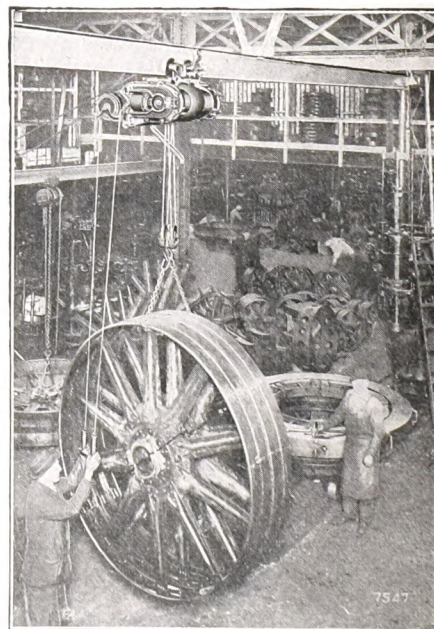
HOIST HANDLING A LARGE PULLEY IN AN ERECTING SHOP
